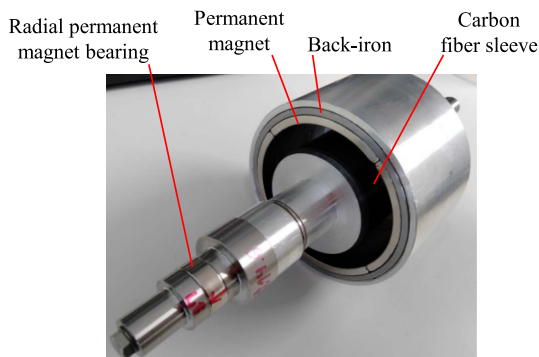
Rotor of the bearingless motor with electrodynamic suspension. The rotor has an inner and an outer parts that embrace the stator coils.
